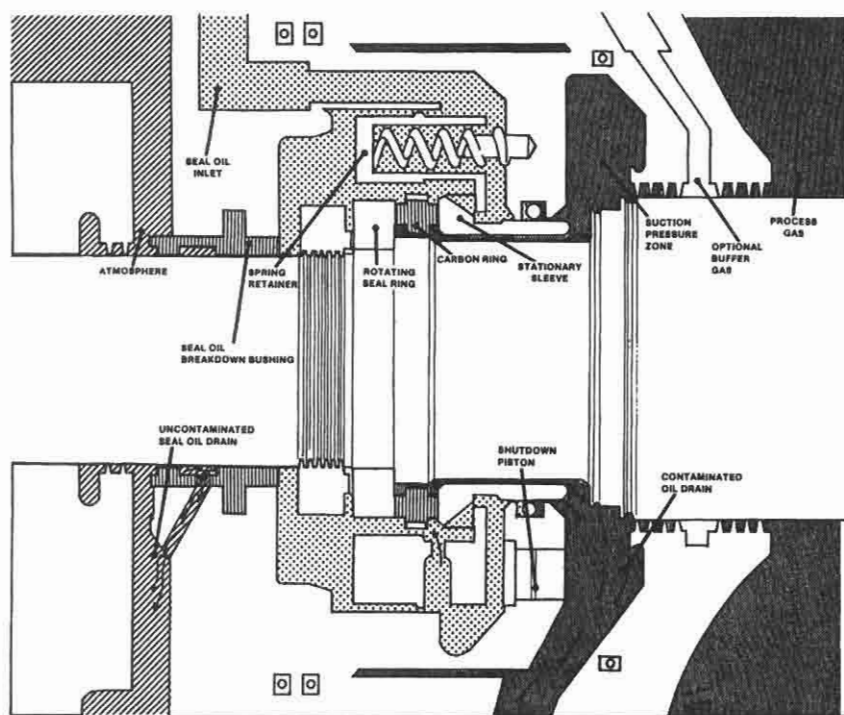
Mechanical shaft seal. (Courtesy of Elliott Company)
